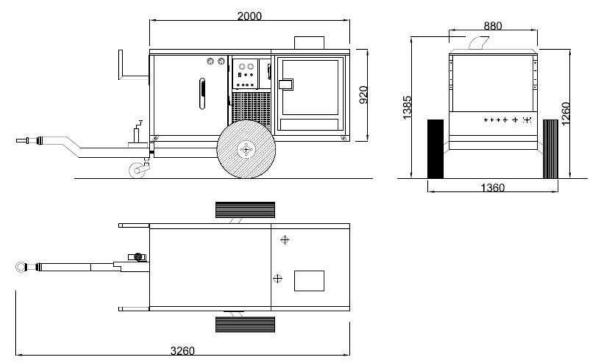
Rotary Power Pack Dimensions (in mm.)
